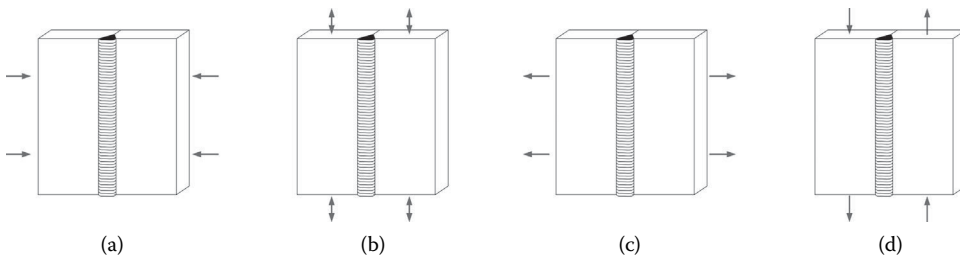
Loading conditions for partial penetration groove welds.
